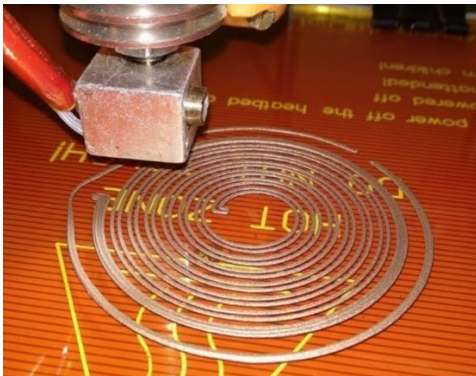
The process of printing spiral coil using by 3D FDM printer
